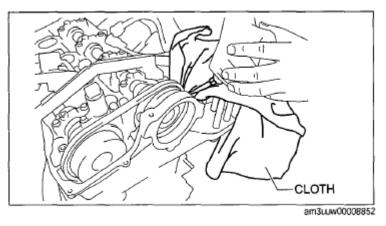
Precaution For Removing Engine Front Cover Using Screwdriver
